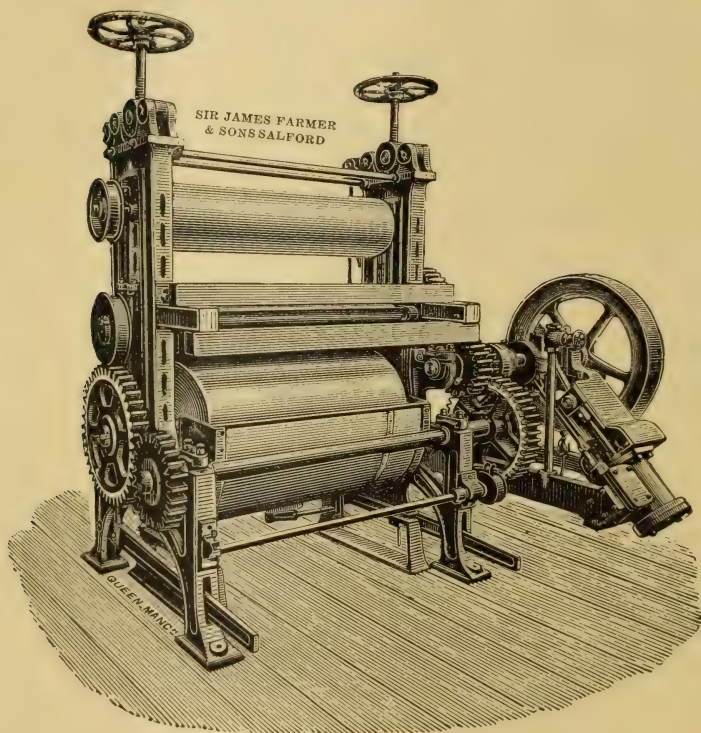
Sizing machine with three rollers, double pressure, and driven by steam.
